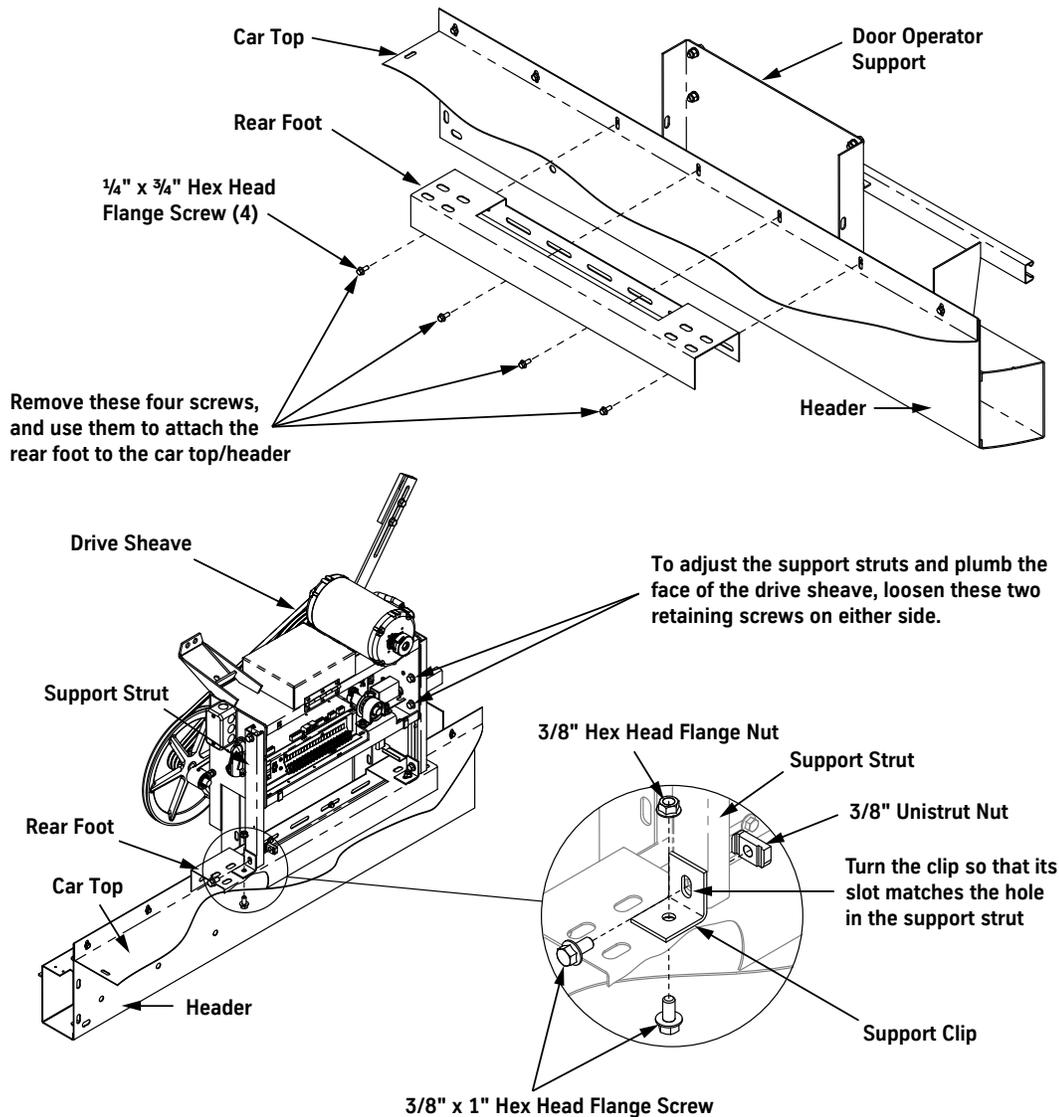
Door Operator Mounted on the Rear Foot Mounting
